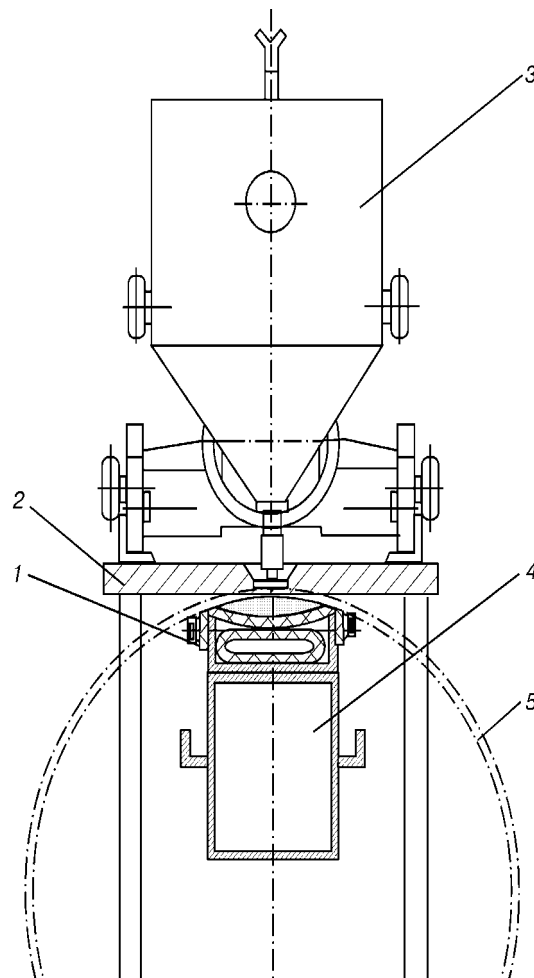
Schematic diagram of installation for automatic submerged arc welding of cylindrical shells on flux cushion: 1 – air hose; 2 – plate with guides; 3 – welding tractor; 4 – pivoted cantilever with flux cushion; 5 – shell
